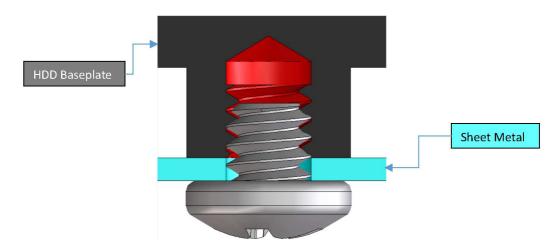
Bottom mount hole, 6-32UNC X 1/8" (2.8 threads engagement)
